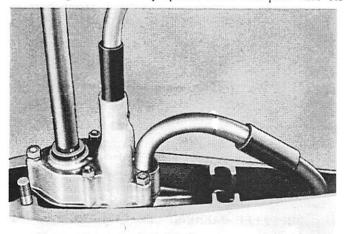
Water Pump Cover Assembly Mounted with Water Lines Installed
